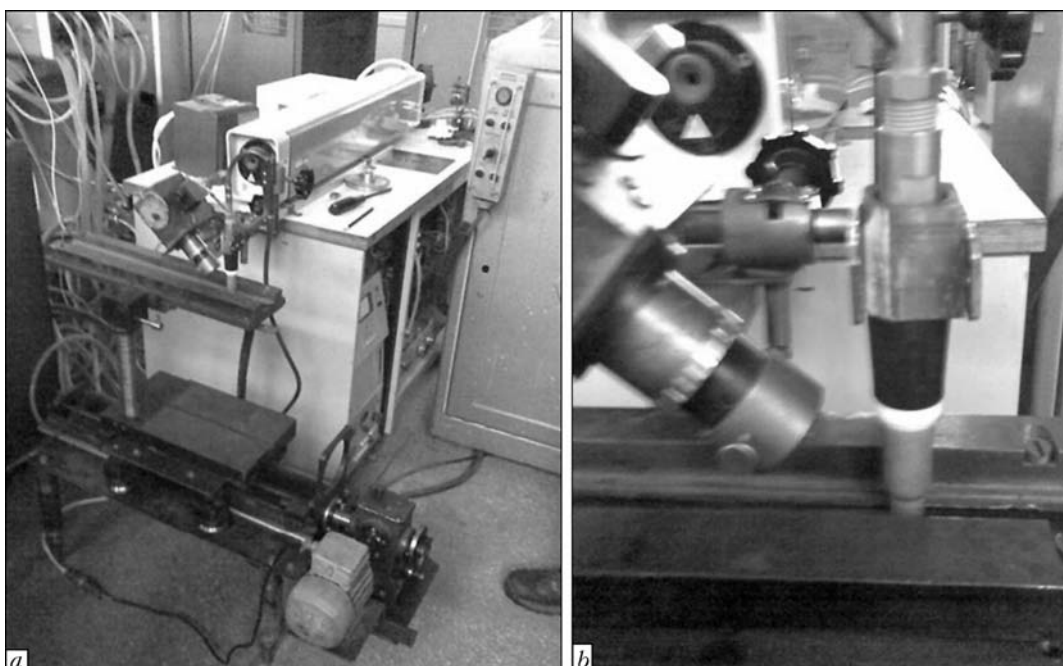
General view of LATIG welding equipment: a – experimental rig; b – welding head
